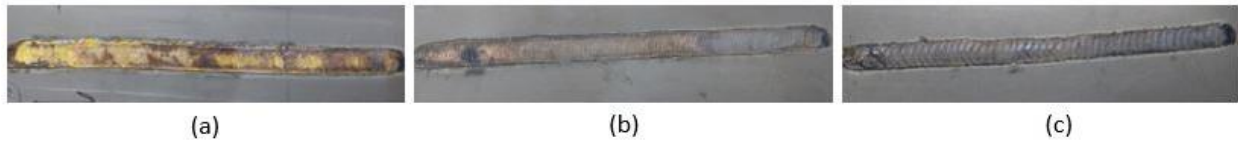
The images of seam weldments at constant electrode force of 3 Kg/cm<sup>2</sup> and welding speed of 1.5 meter per minute after peel test as (a) Interfacial failure at 7 kA (b) Partial pull out failure at 8 kA and (c) Pull out failure at 12 kA.
